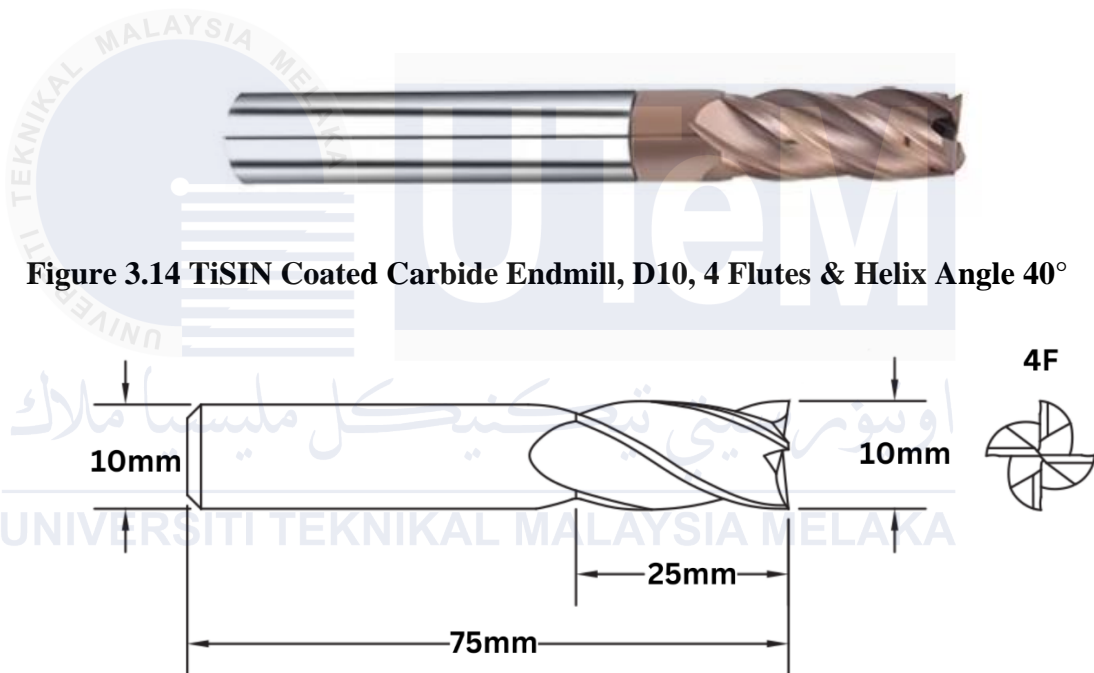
TiSiN Coated Carbide Endmill, D10, 4 Flutes & Helix Angle 40°
